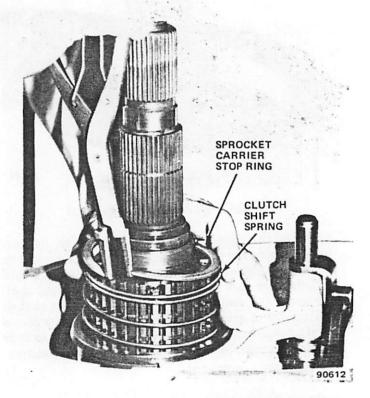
D-17 Sprocket Carrier Stop Ring and Clutch Spring Removal/Installation
